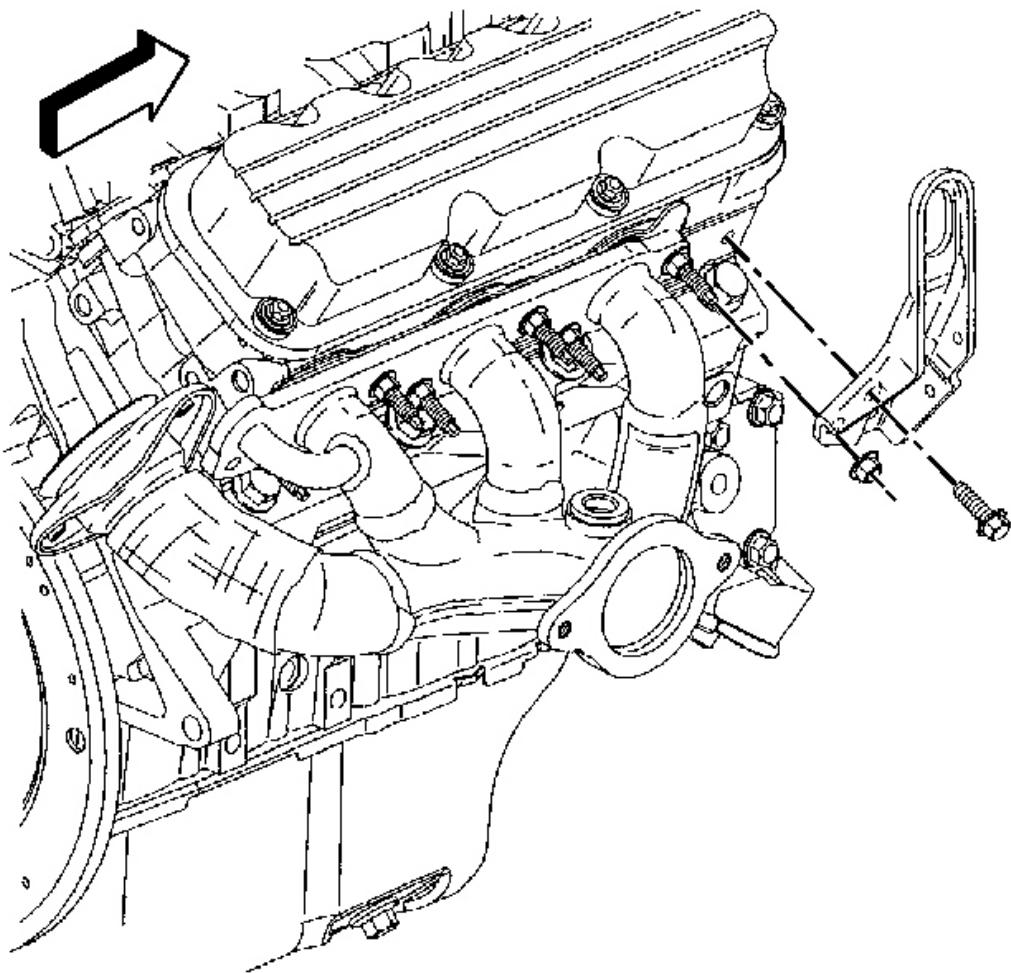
View of Fuel Injector Sight Shield Mounting Bracket
